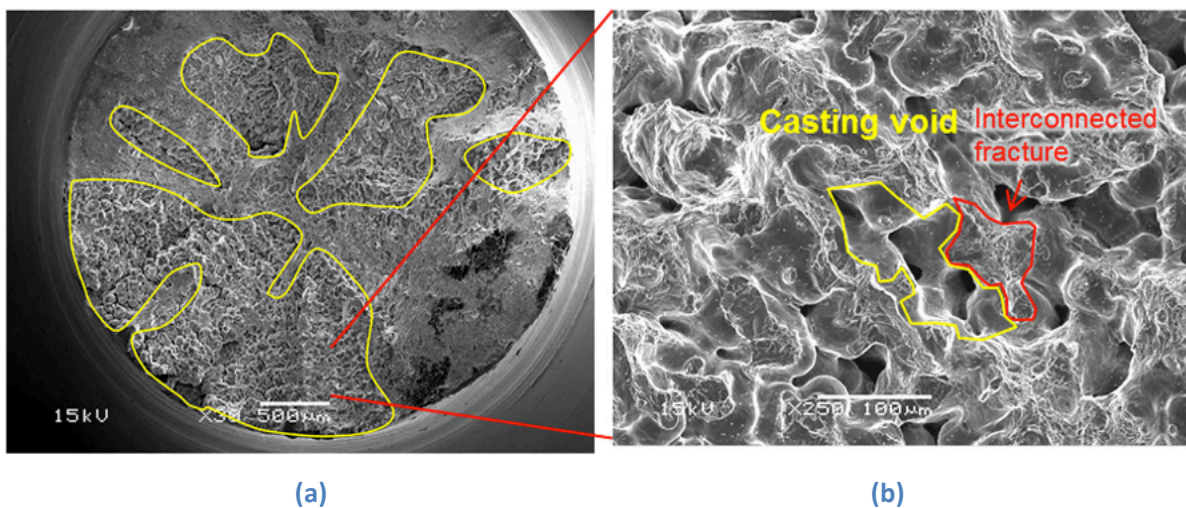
Representative fracture surfaces from a round cast tensile bar
